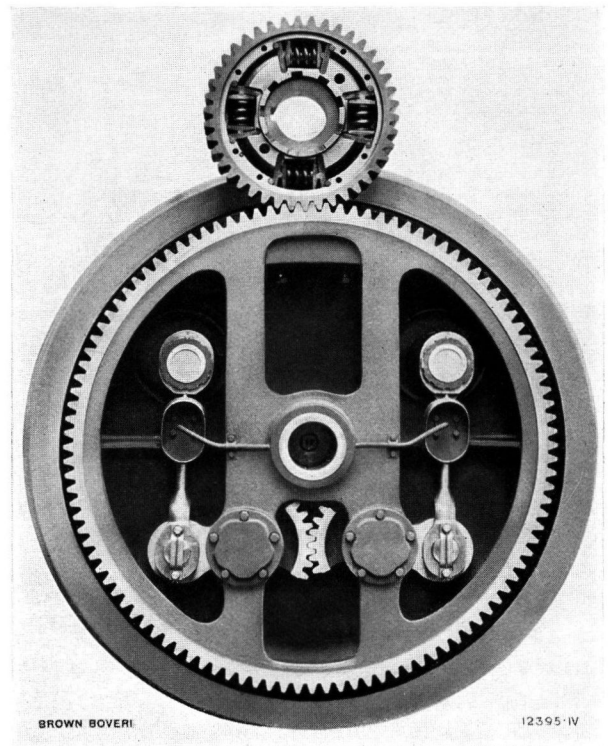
Gear wheels with Brown Boveri coupling device and driving wheel.
